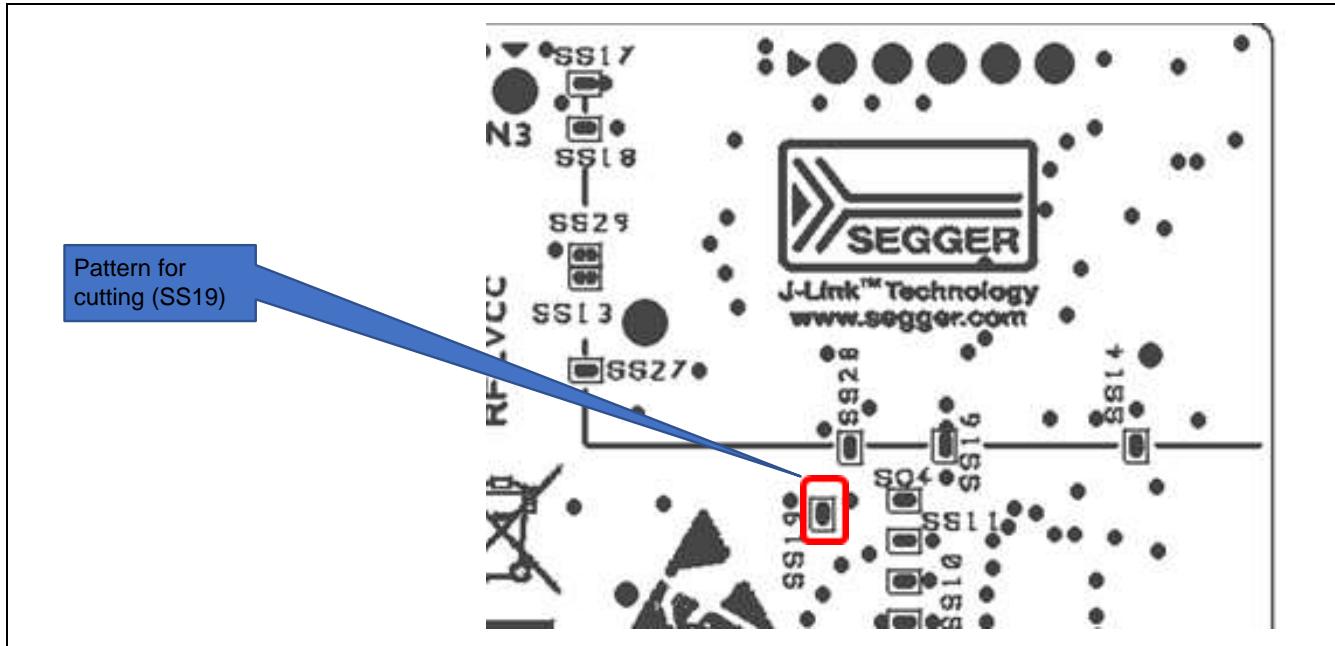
Position of the Pattern for Cutting (SS19) (Soldered Side)
